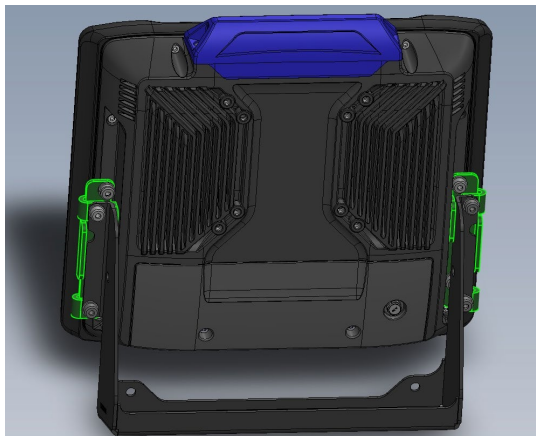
Mounting bracket with adapter on DLT-V73
